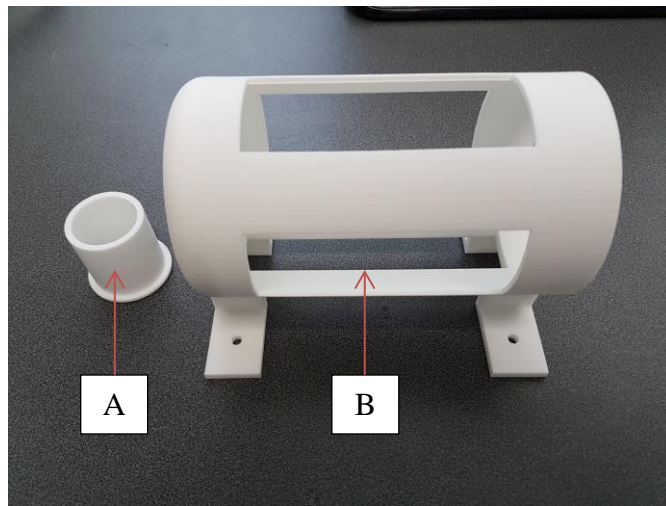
(A): 3D printed bush. (B): 3D printed frame for the piGrip[®] bellows.
